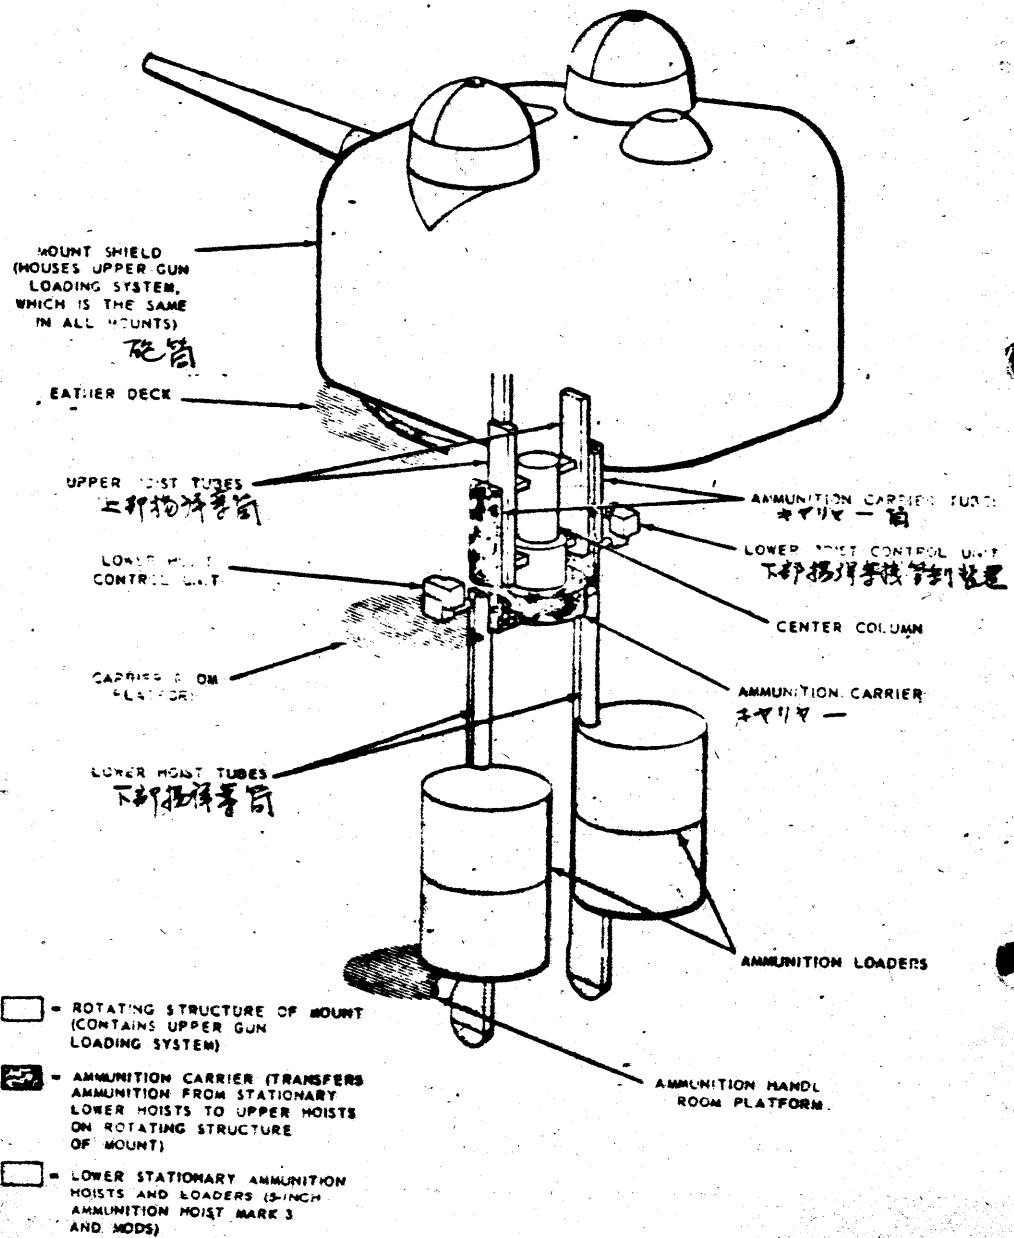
Typical Arrangement of Lower Hoists and Carrier in Mount 1-6 Mounts
